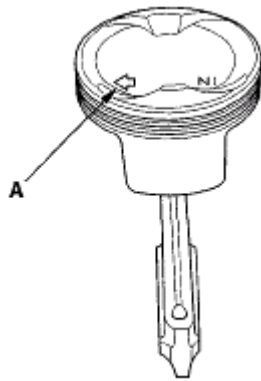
Identifying Cam Chain Side Of Engine Mark
